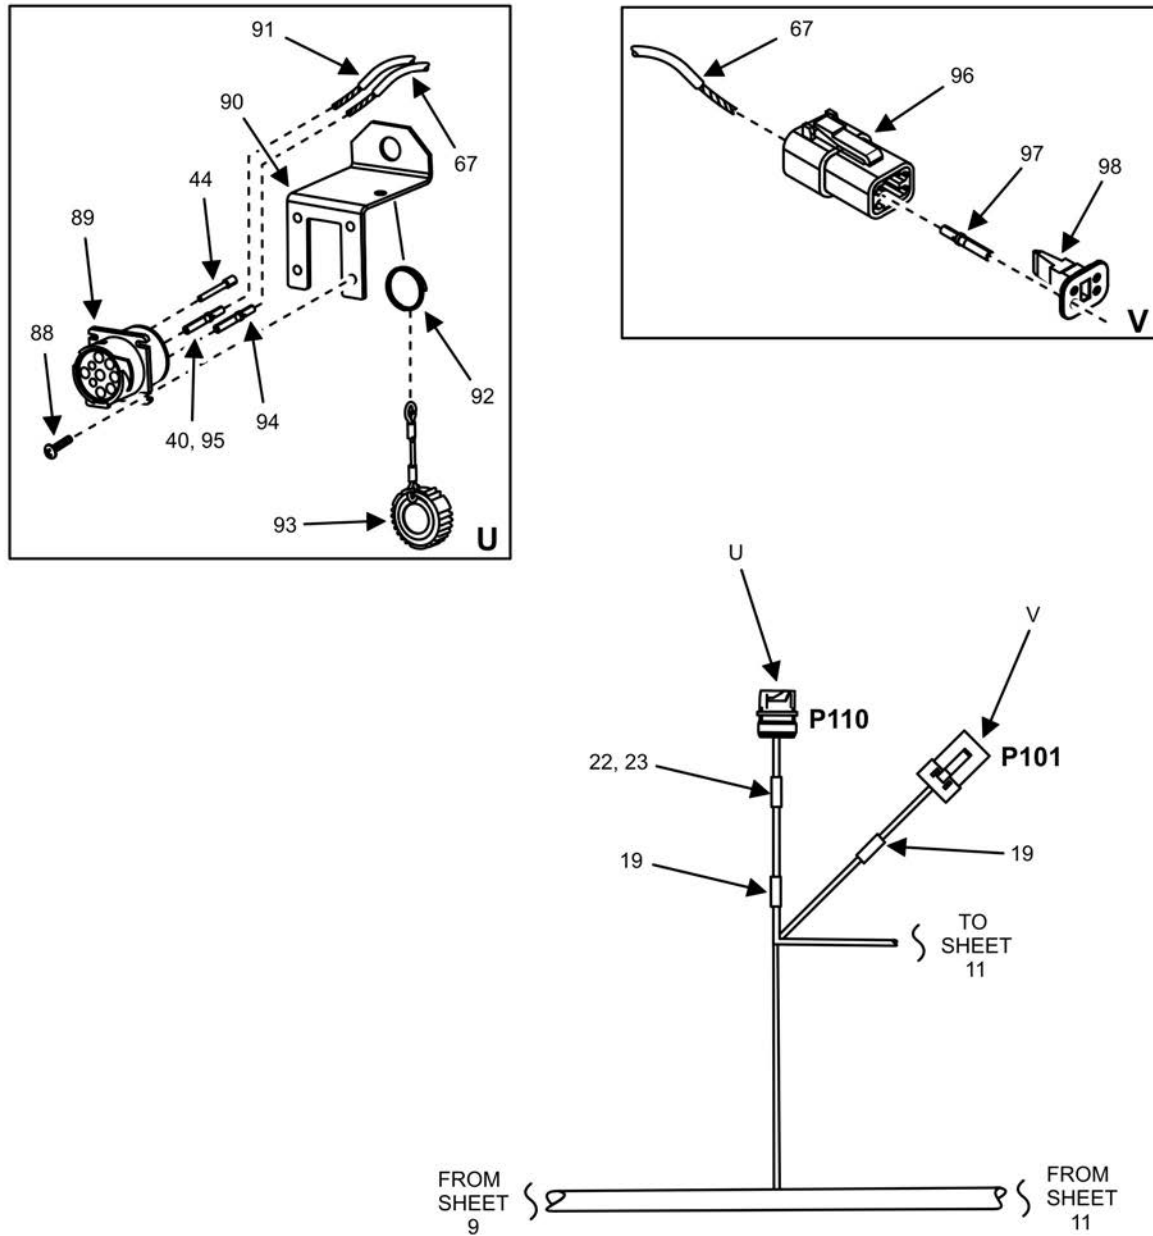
Engine Wiring Harness (Sheet 10 of 19).
